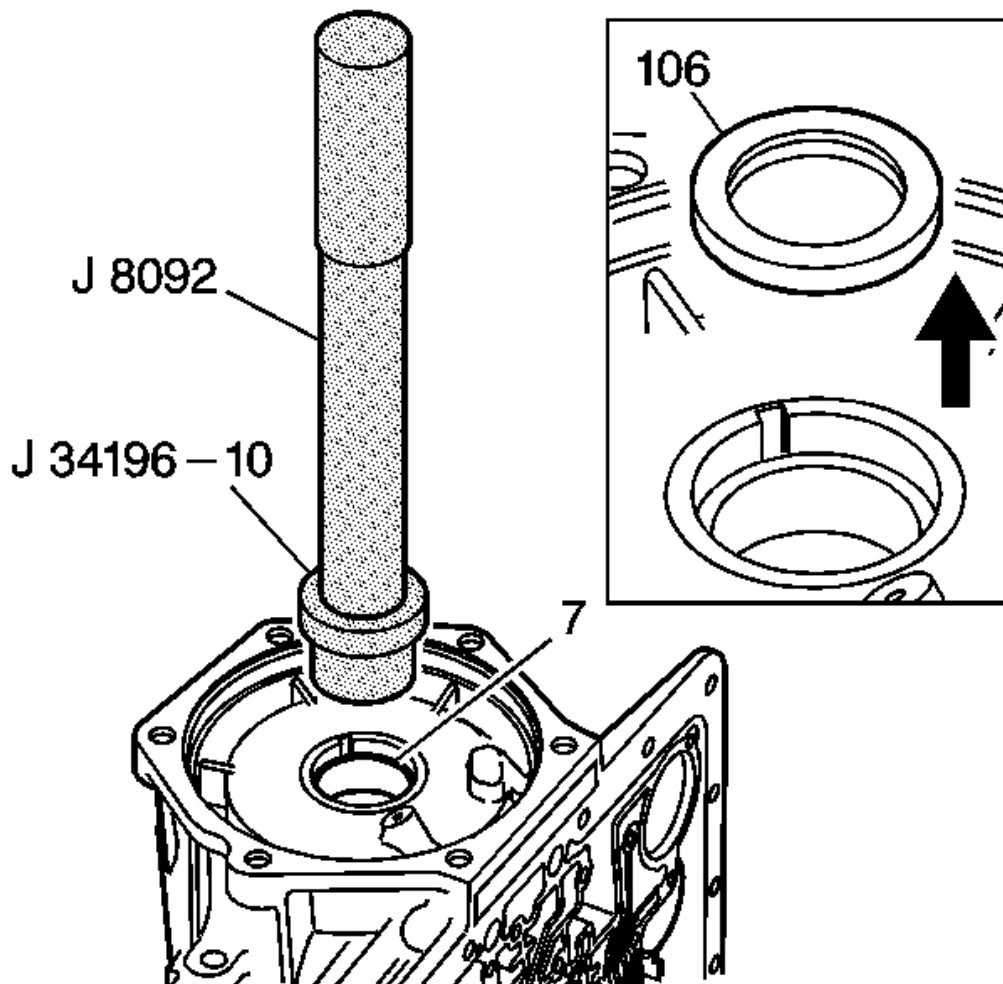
Identifying Case Rear Oil Seal & Case Bushing
